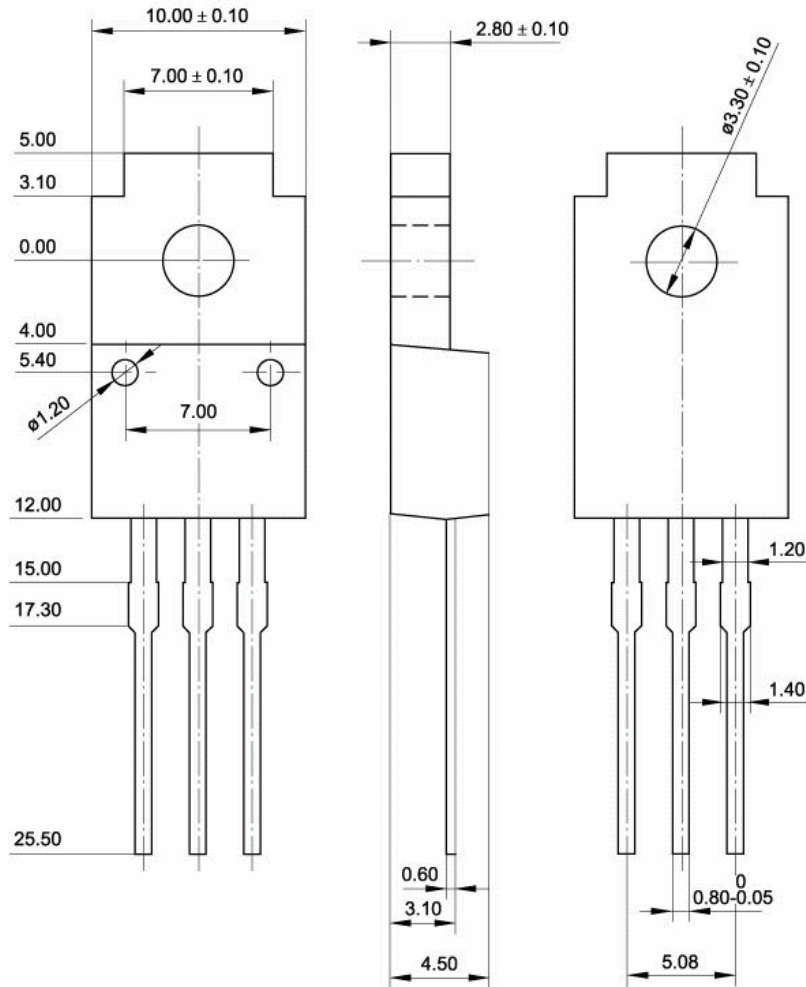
Outline dimensions (unindicated tolerance:  $\pm 0.15$  mm)
